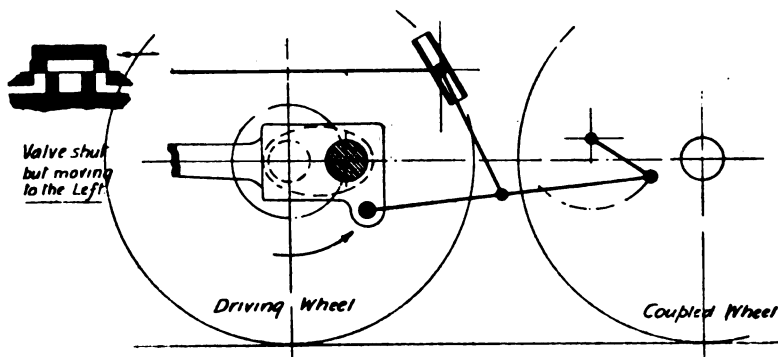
BIG END ON THE BACK DEAD CENTRE; VALVE COMMENCING TO OPEN RIGHT-HAND PORT.
